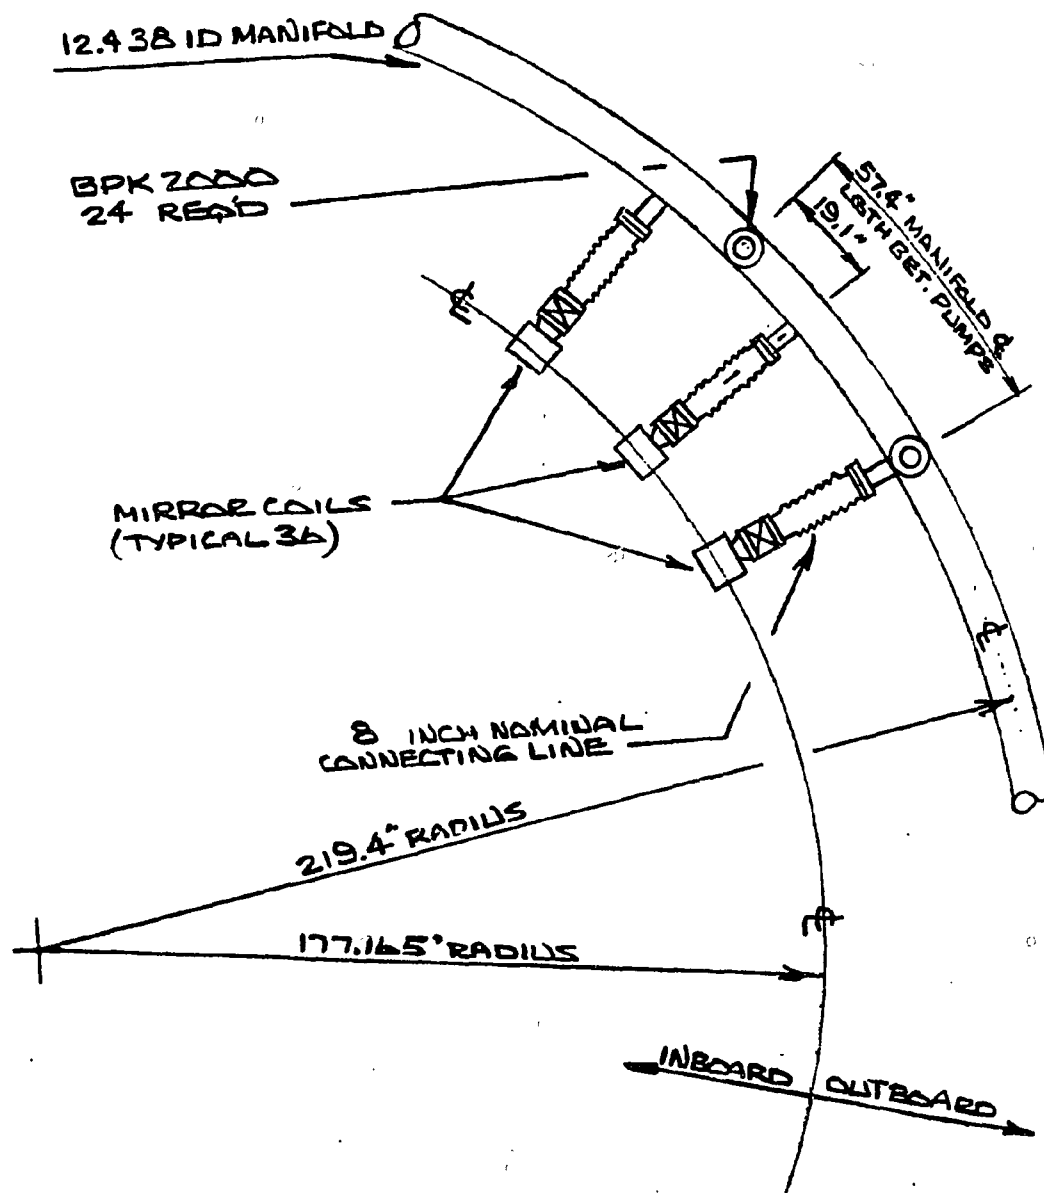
PLAN VIEW OF MC DEWAR, OUTBOARD 12.44 INCH MANIFOLD SYSTEM WITH 24 BPK-2000 PUMPS AND 8 INCH NOMINAL DUCTS
